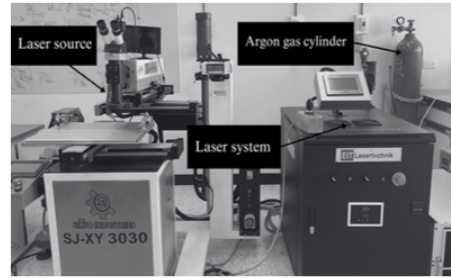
Experimental setup of Nd: YAG laser welding
